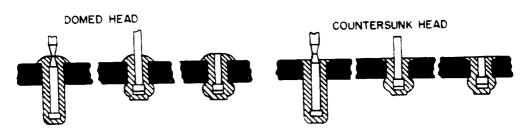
ILLUSTRATION OF RIVET STYLES BEFORE AND AFTER SETTING
